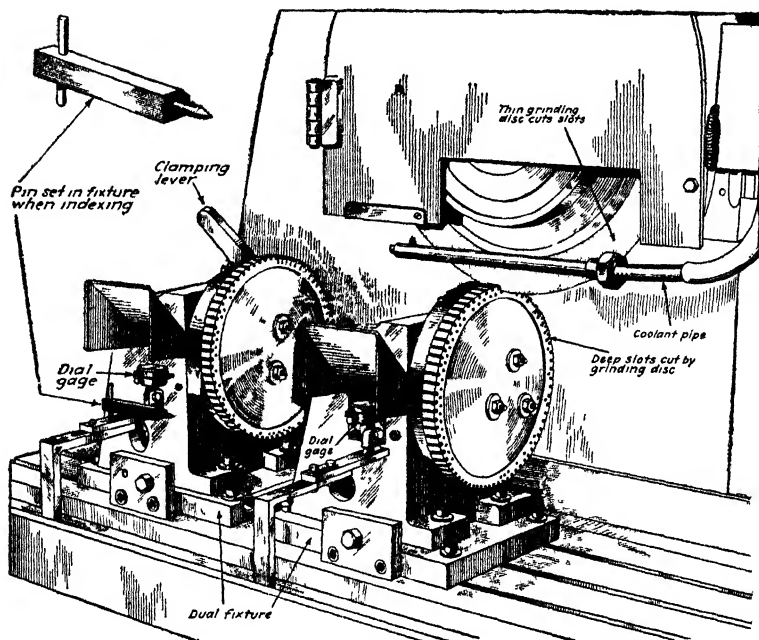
A.—Fixture for grinding narrow slots for turbine blades
